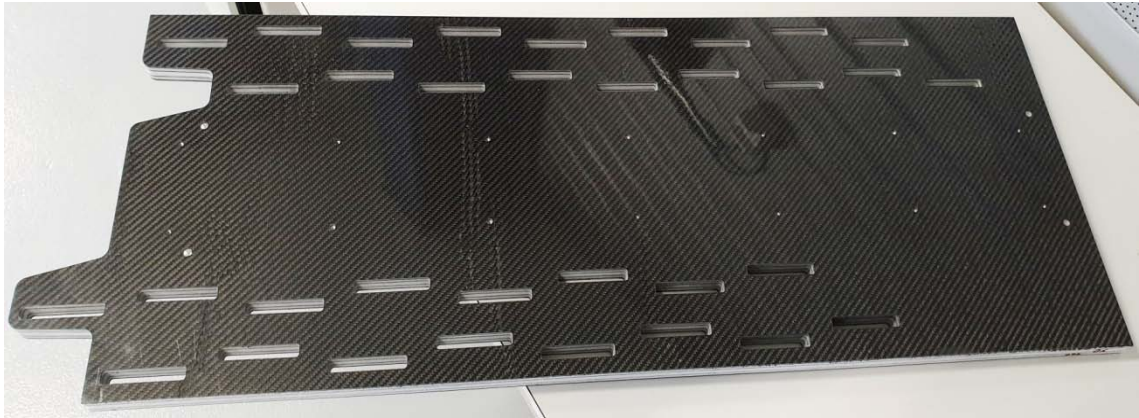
Full size top and bottom carbon reinforced plate, (prototype)
